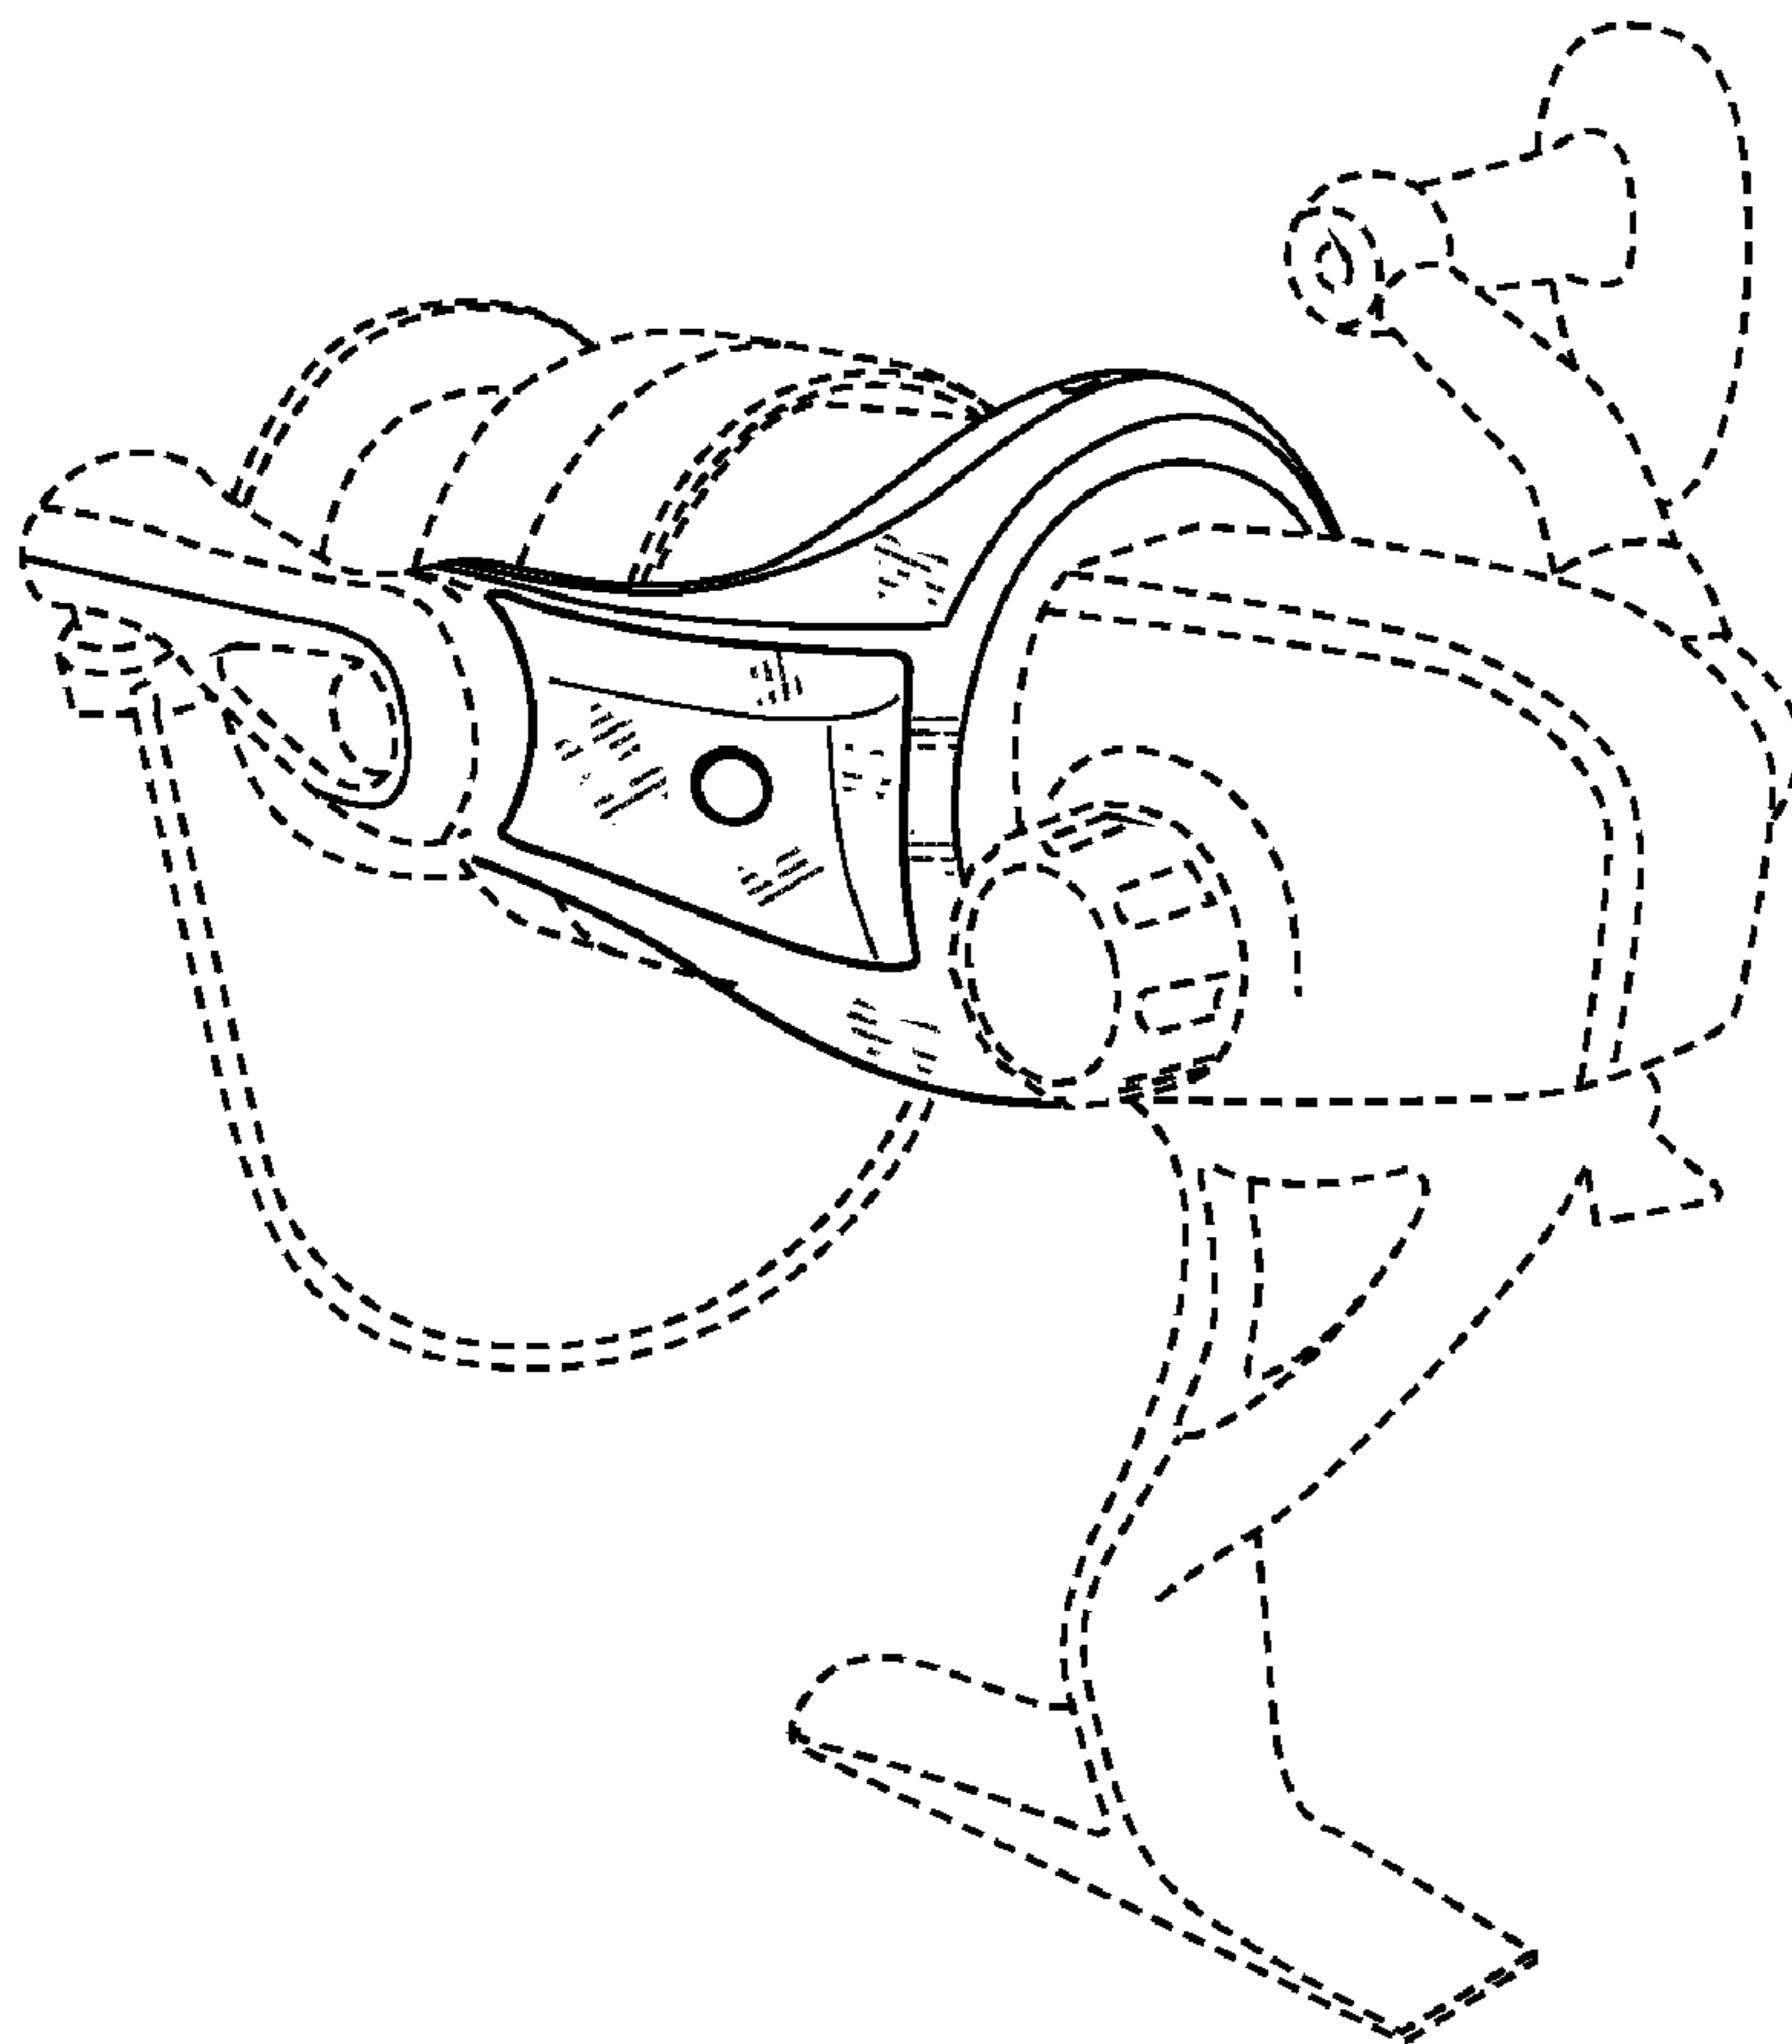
is a right side view of a lighted fishing reel rotor of FIG. 1.
